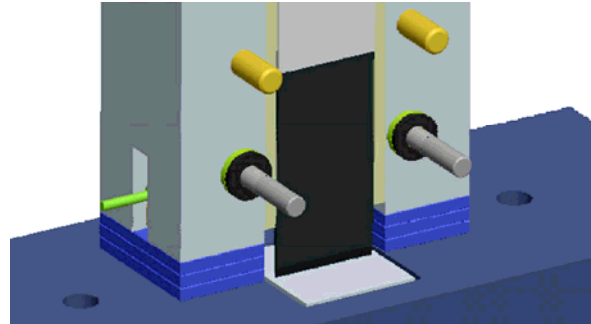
Test fixture and specimen (with relative trigger mechanism) developed by Engenuity.
